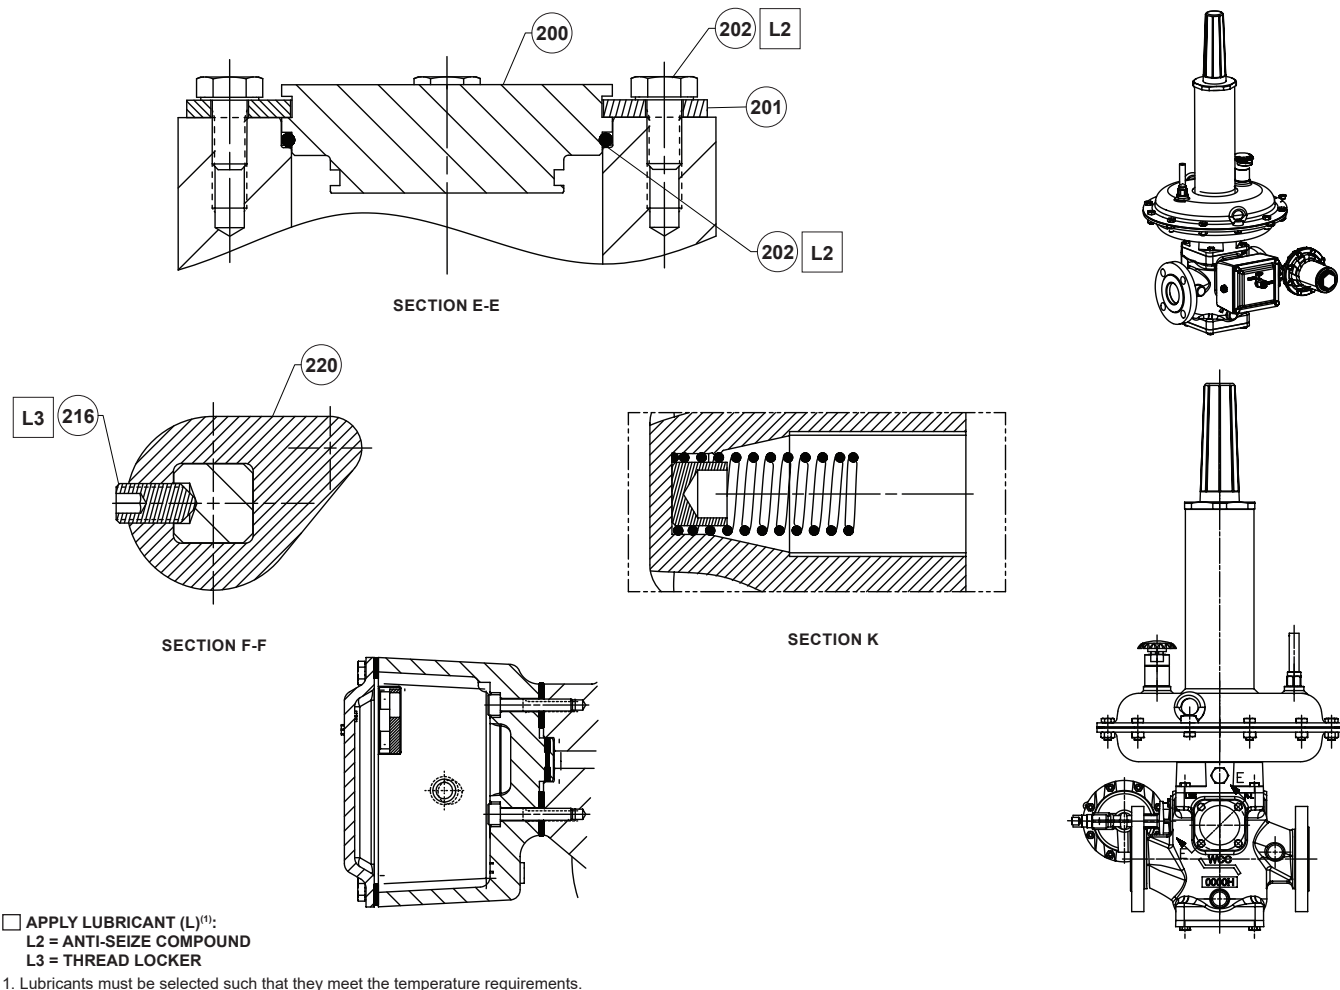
LSR Series Slam-Shut Device Assembly (continued)
